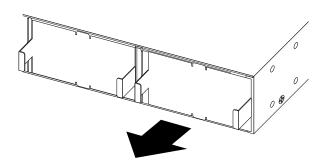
Removing a Blank Panel from the EPS-C2 Chassis
